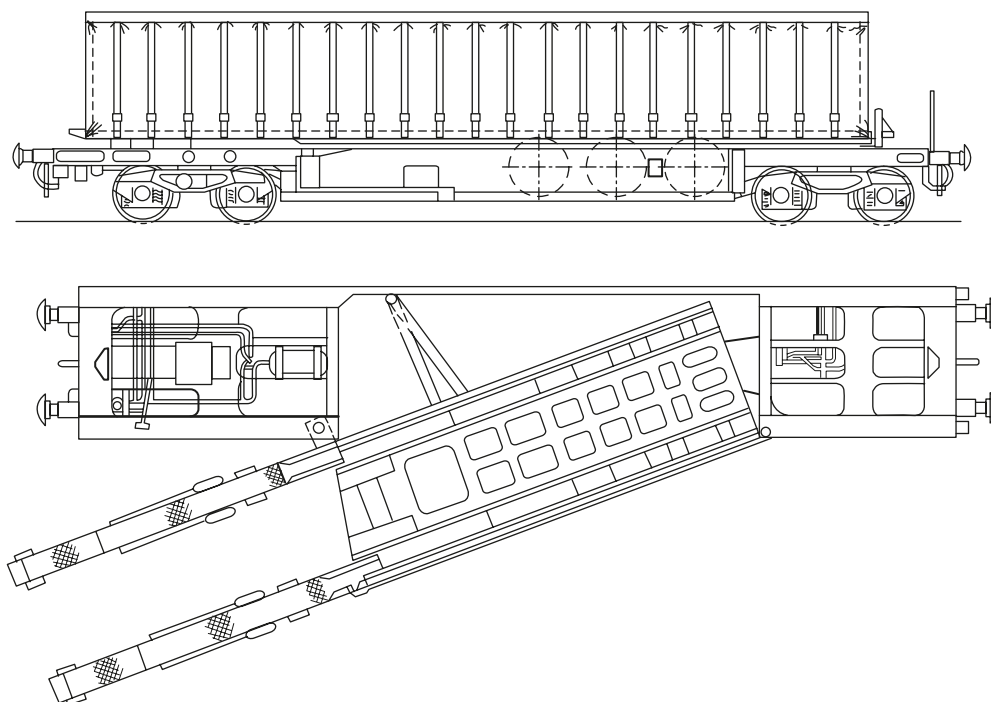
Detail of Tiphook Rail's piggyback loading system showing side view with a 40-foot container/semi-trailer in position and a plan view with hydraulic ramp in loading position.
